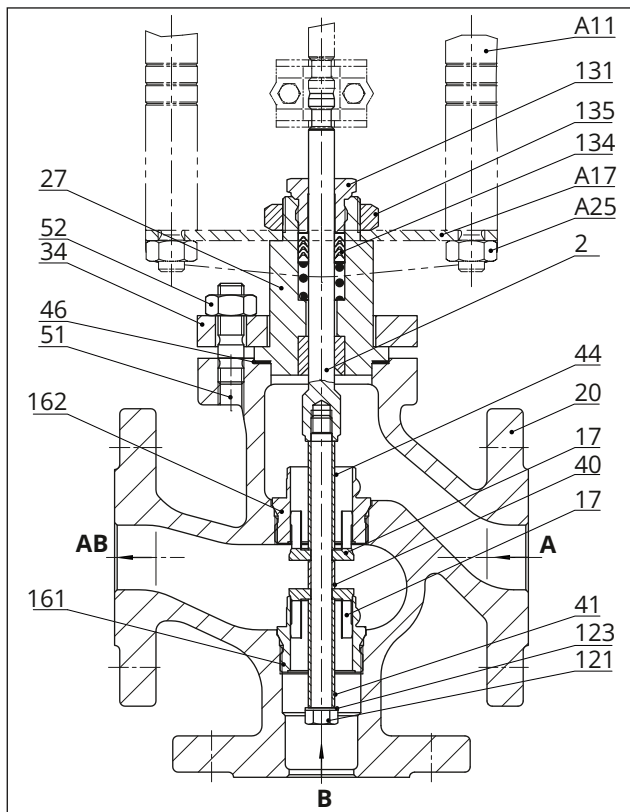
Type 3323 Valve (mixing valve), DN 15 to 50/NPS ½ to 2 · Mounting using a central nut (form B attachment)
